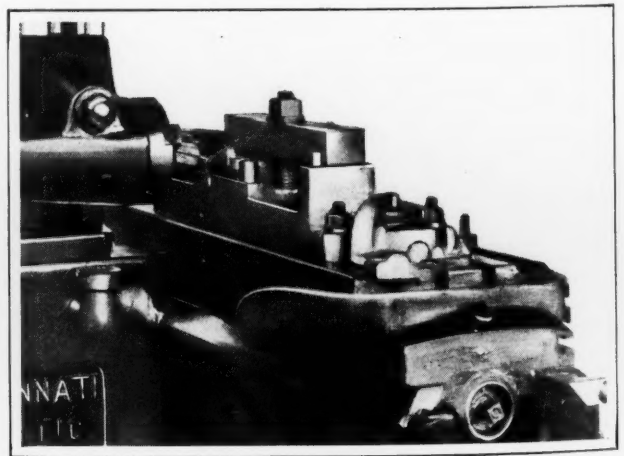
Plain Automatic Milling Machine Set up for Milling Pads on Casting Shown in Fig. 8
